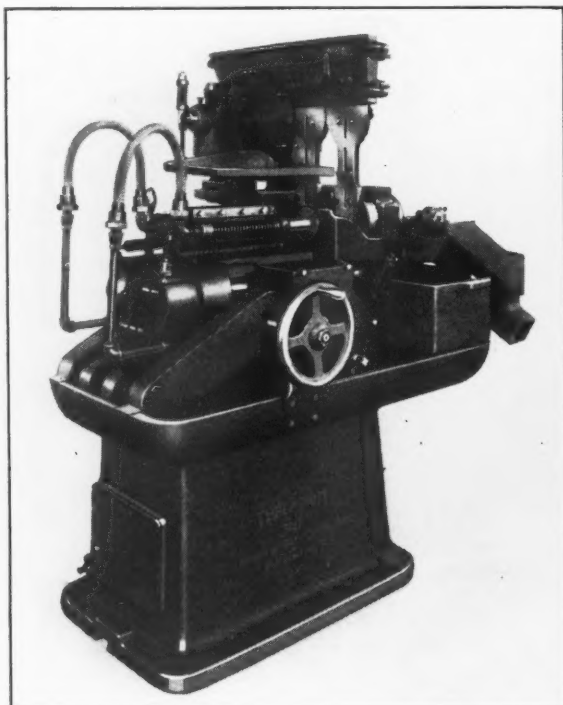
"Threadnut" Automatic Nut-tapping Machine with Two Spindles
